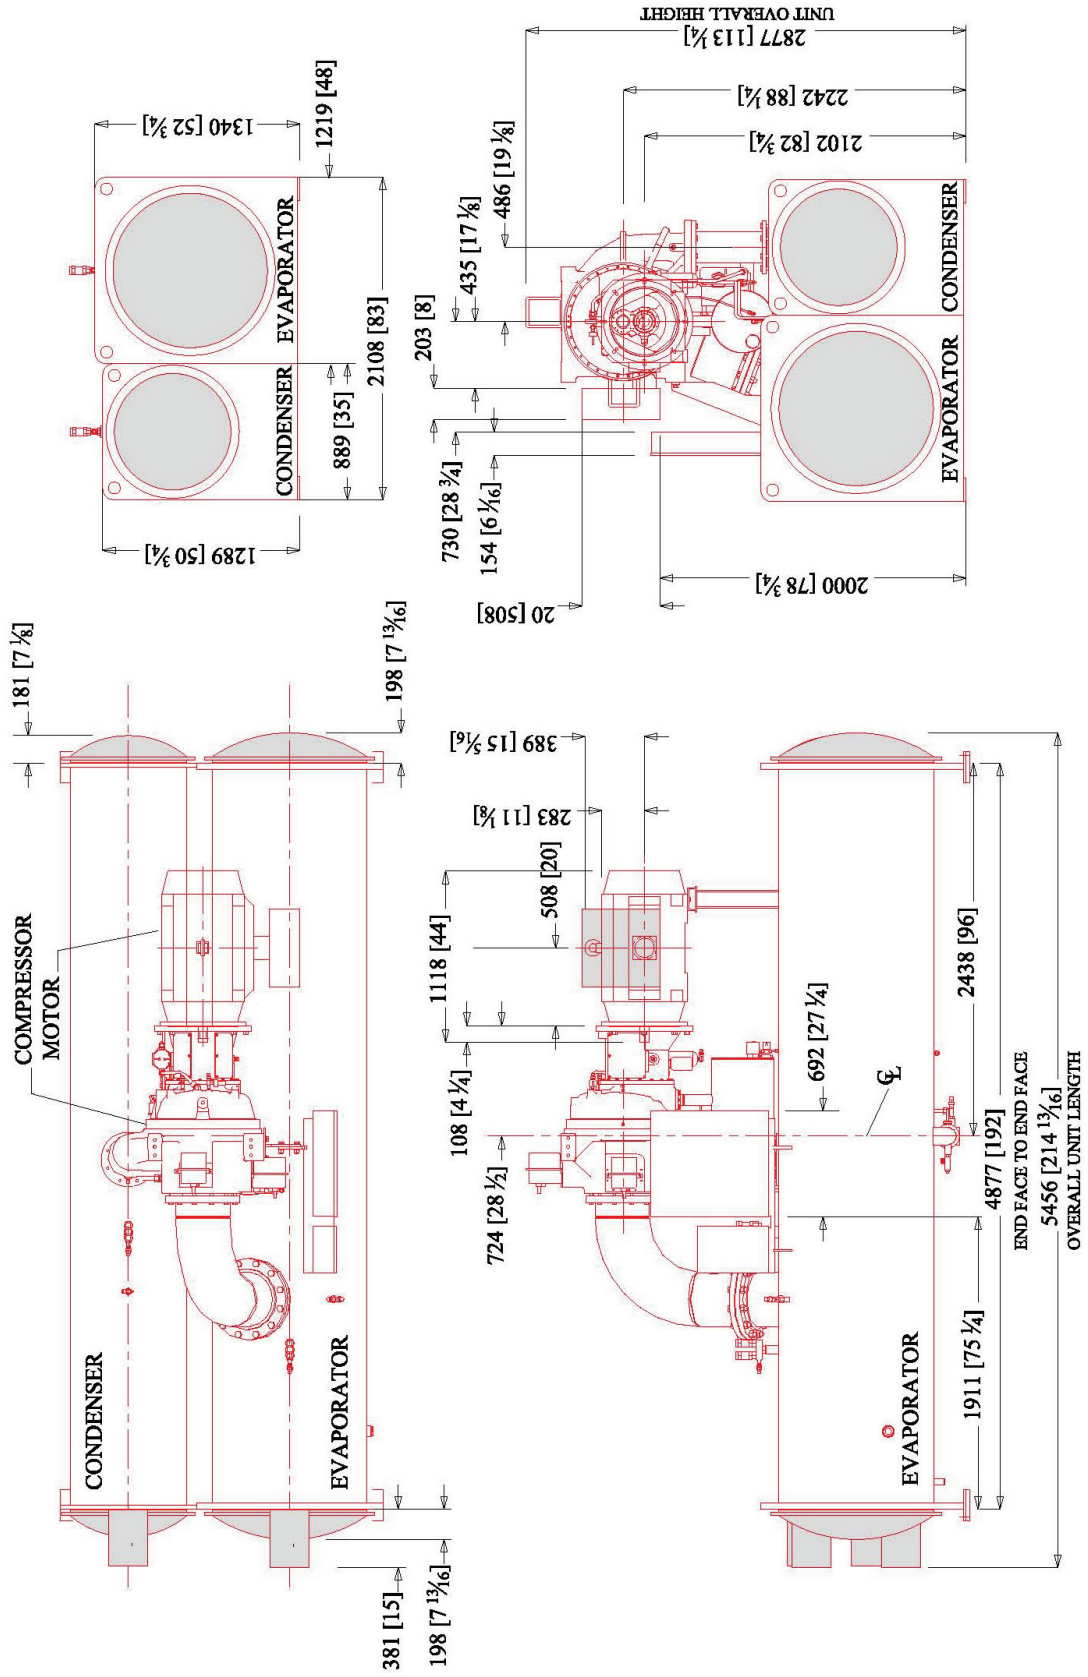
Test Specimen (Centrifugal Chiller) Dimensions (units : mm[in])
